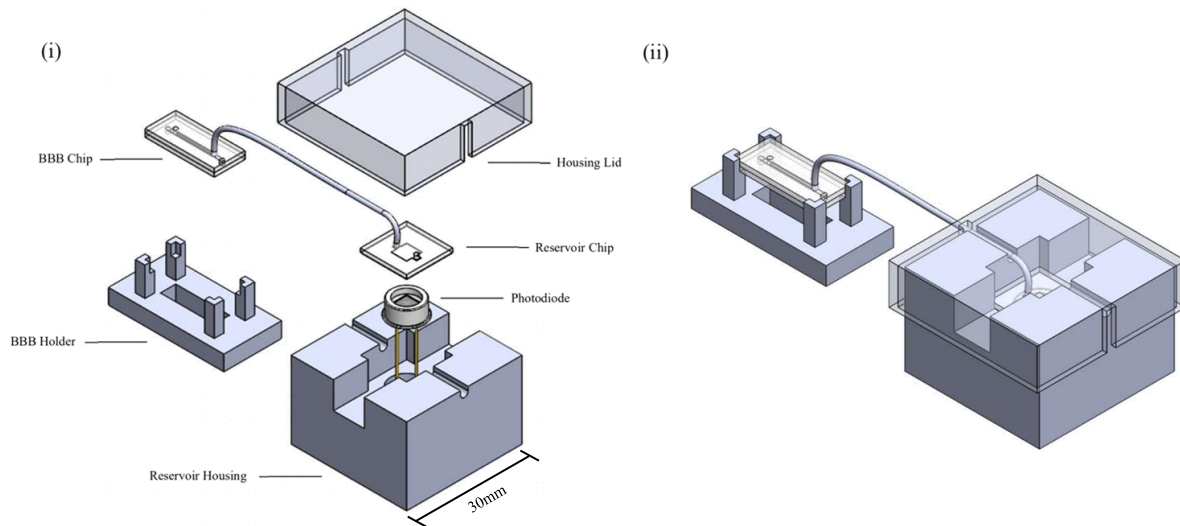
(i) Device design exploded view with measurement for reference, (ii) Device design assembly. Only the tube connecting the BBB chip to the reservoir is shown here but, there will be tubing in all inlets/outlets. The cap has been made translucent for viewing purposes. All design done in SolidWorks.
